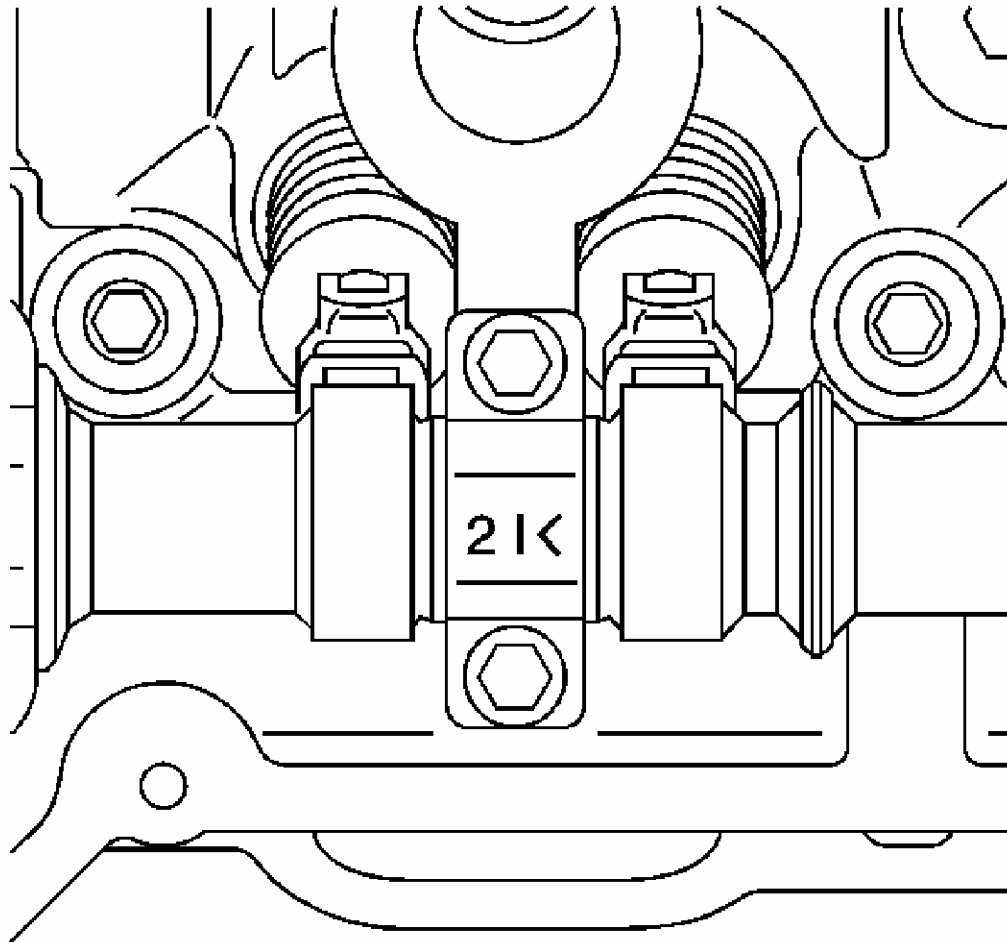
View Of Intake Camshaft Bearing Cap Markings
